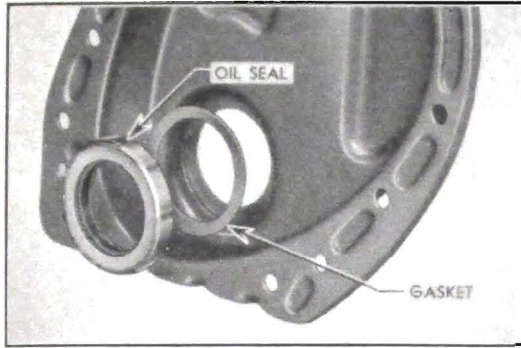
Timing Chain Cover Oil Seal and Gasket
